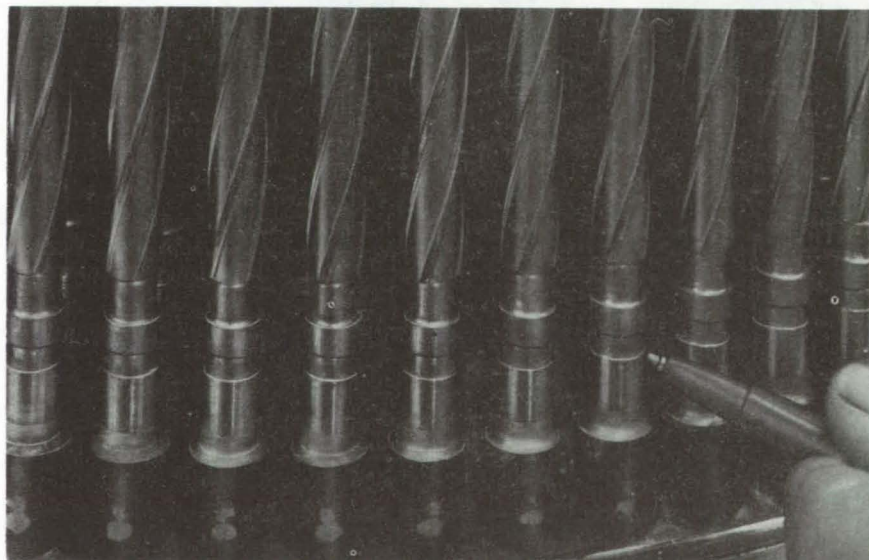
Electrochemical Deburring removes burrs from the assembled injector tubes. Because the process uses a liquid anodic dissolution in a liquid electrolyte to provide the deburring action, it can smooth surfaces and edges in otherwise inaccessible areas.
